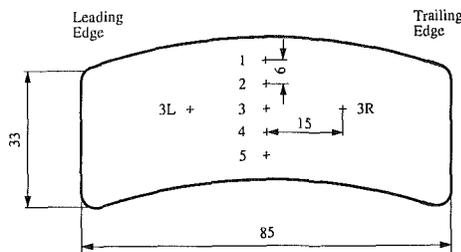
Thermocouple locations in the brake pad (all dimensions in mm.)
